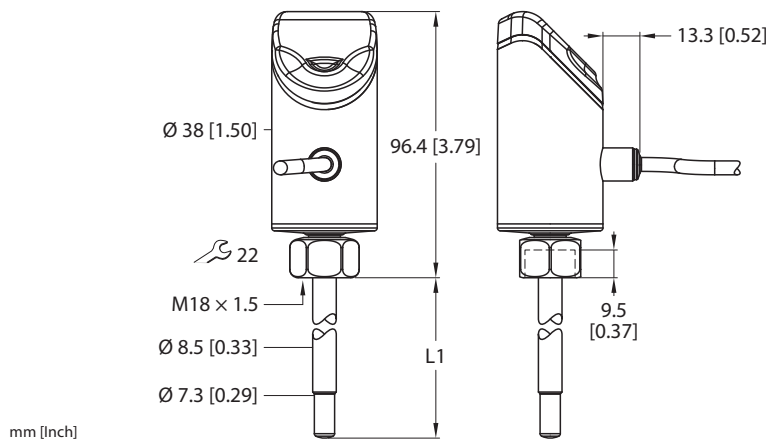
Dimensions — sensor with cable connection without screw-in adapter
